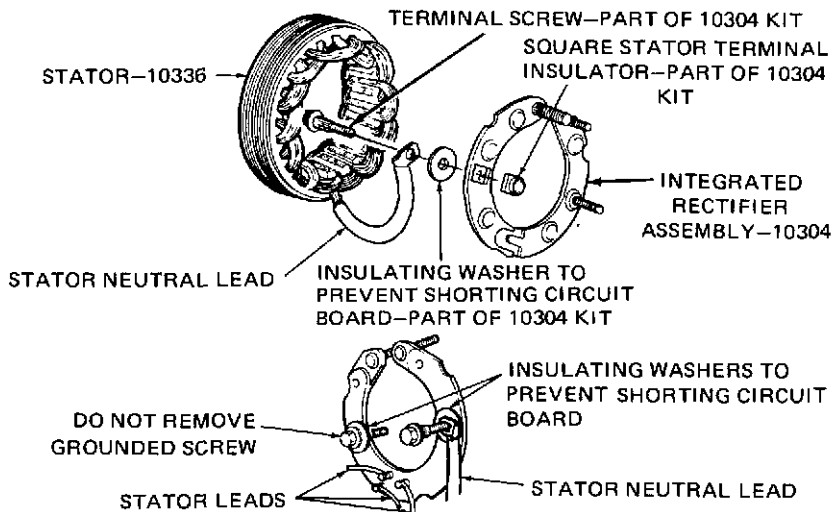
Stator Terminal Installation -- Integral Rectifier Circuit Board
